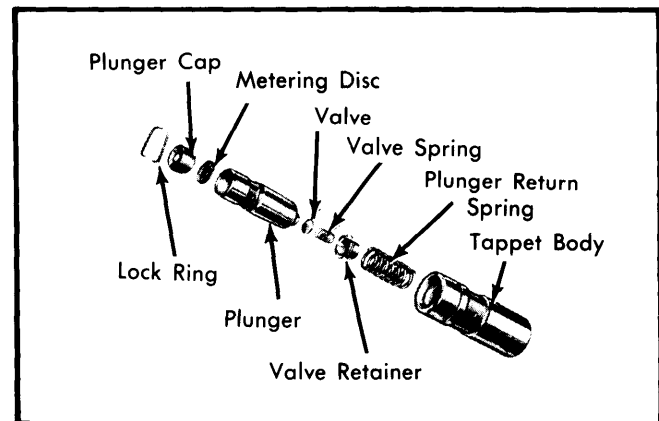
Exploded View of Hydraulic Lifter Assembly
